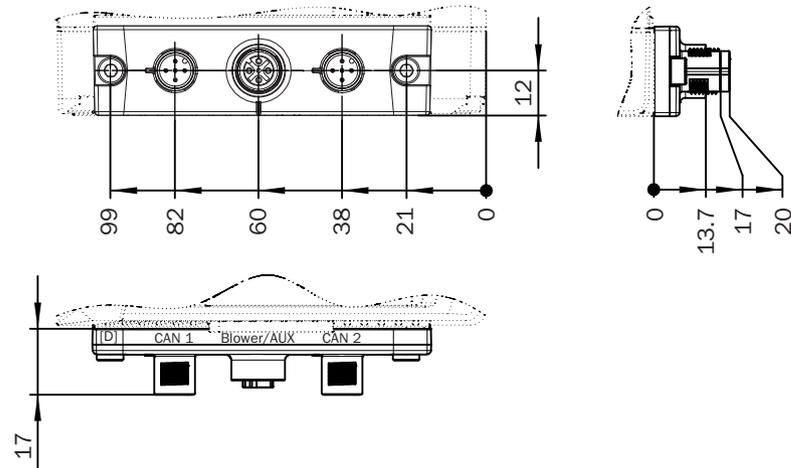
Dimensions of cloning plug D (M12), all dimensions in mm
